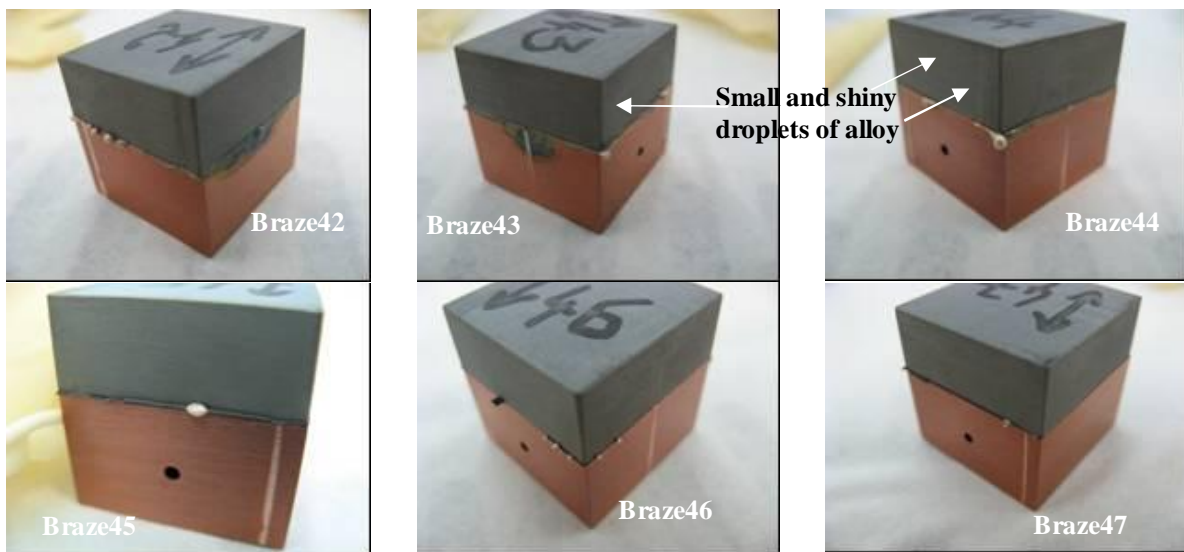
Samples Braze42 to Braze47 after brazing and before shear tests
